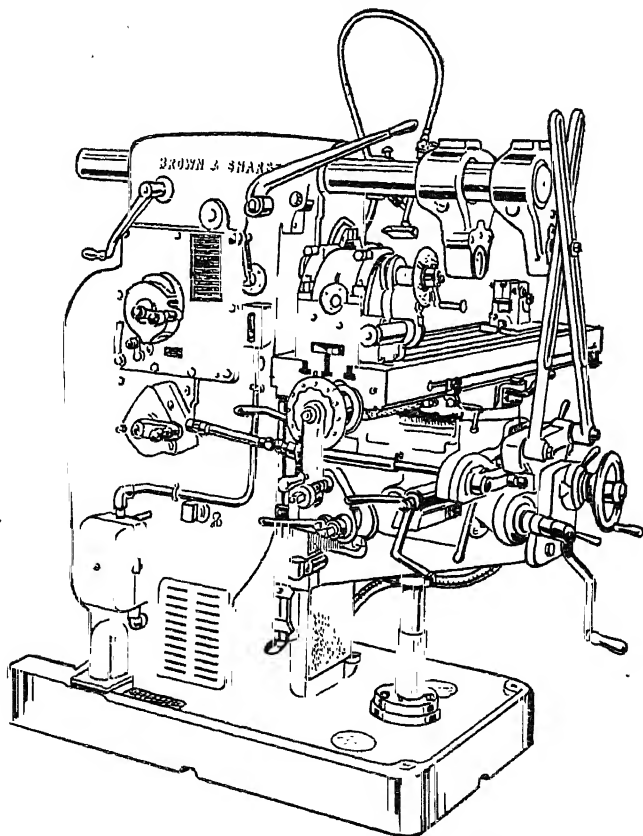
Brown and Sharpe dual-control type universal milling machine.
